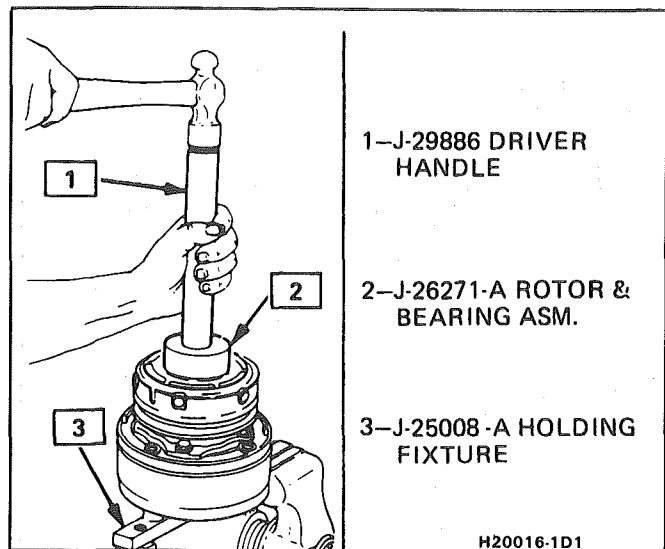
Installing Rotor & Bearing Asm. V-Groove Type
